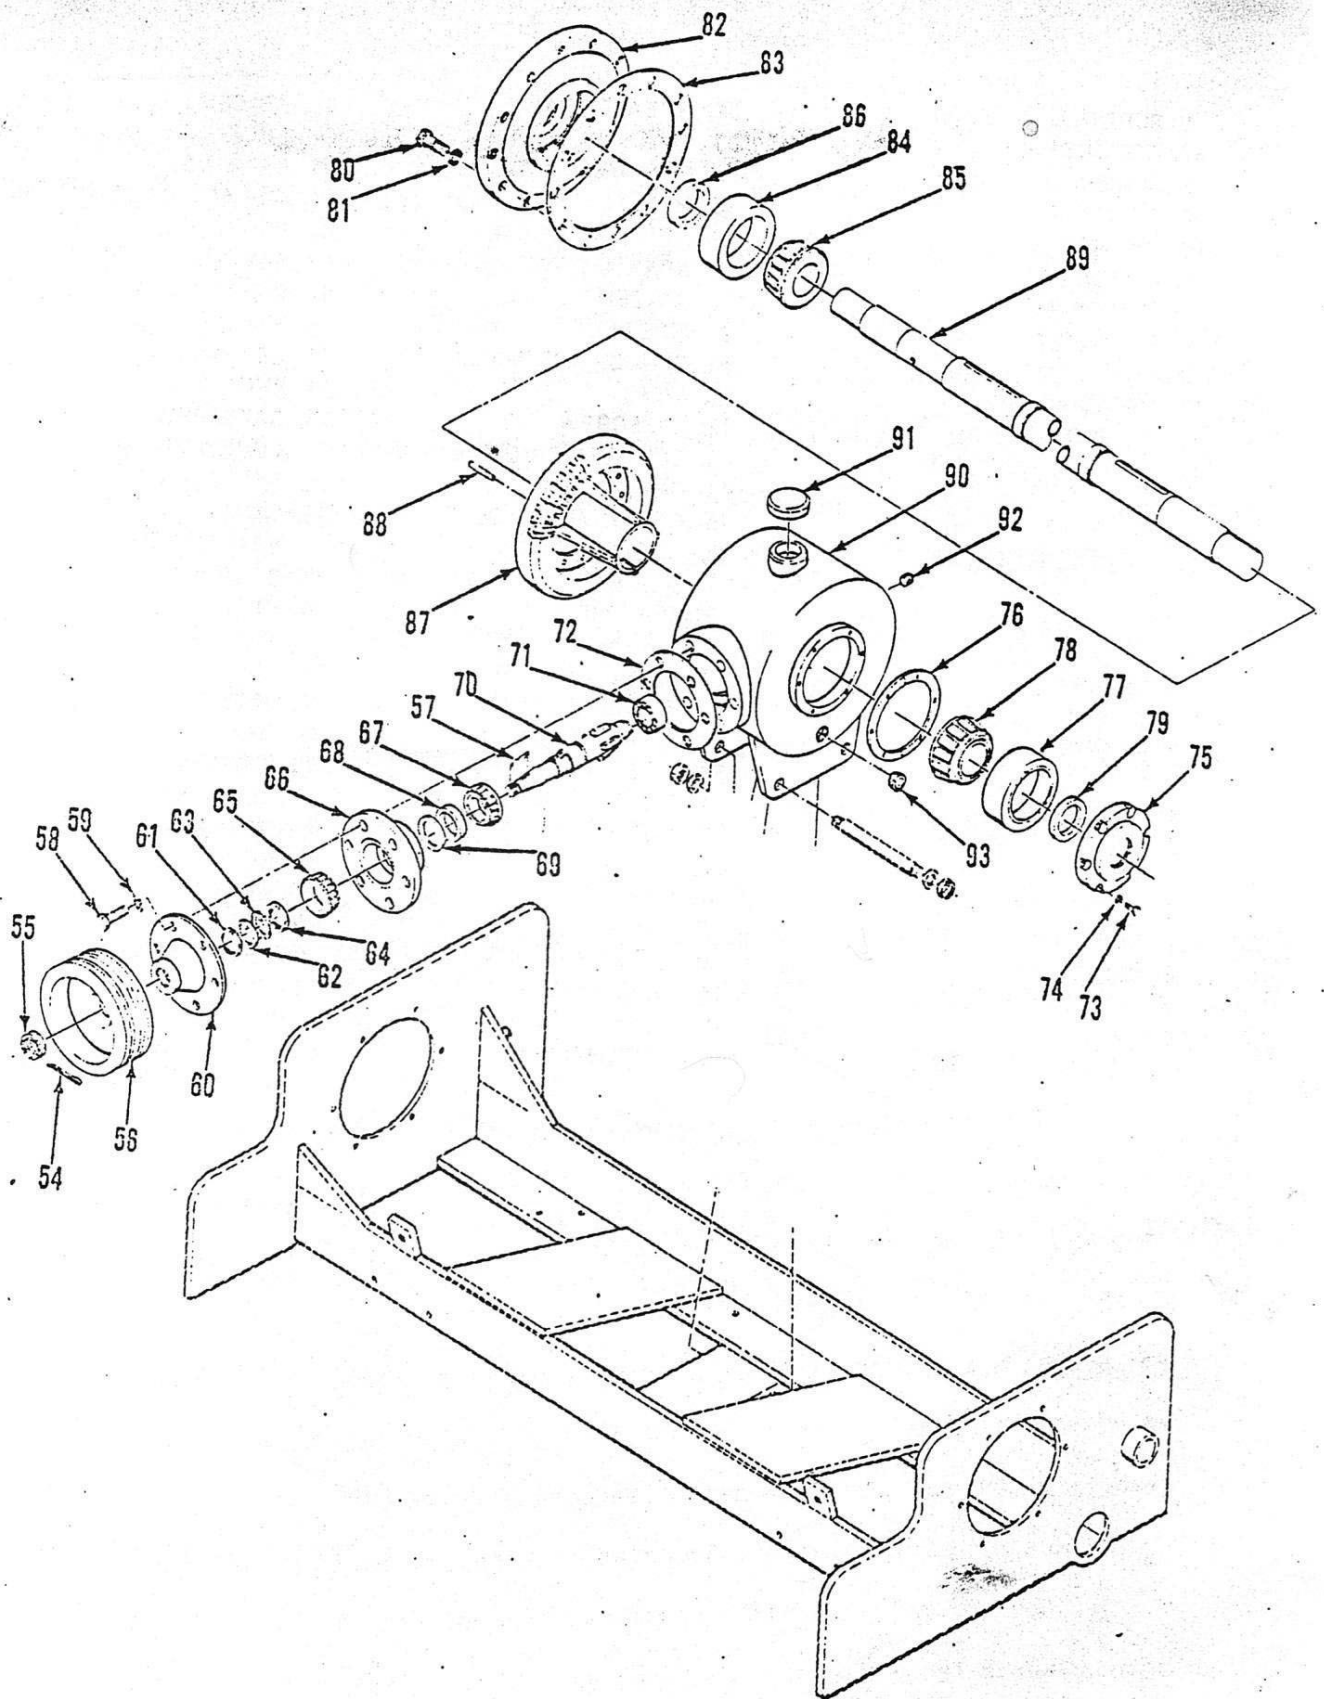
Drawworks and Drive Assembly (View 2 of 2)
